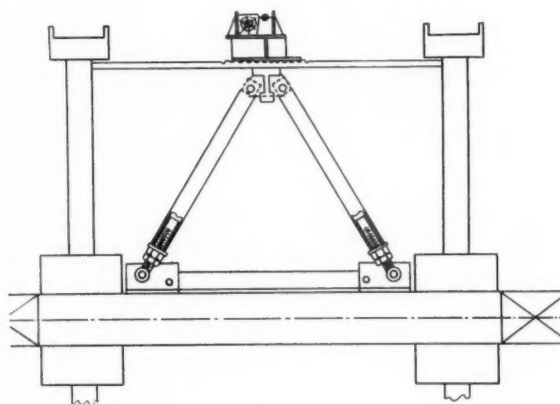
Section through hoist drum shows positioning of drum jacks which were installed to help carry the load to the shaft bearings and relieve some of the drum stresses
